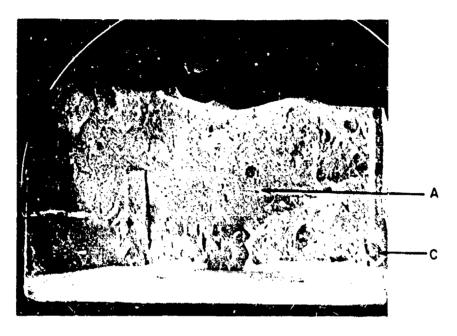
Tensile fracture surface of a hydrogen-embrittled HY-130 specimen, 9x.
